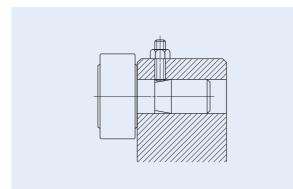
Mounting example of Easy Mounting Type Cam Follower
